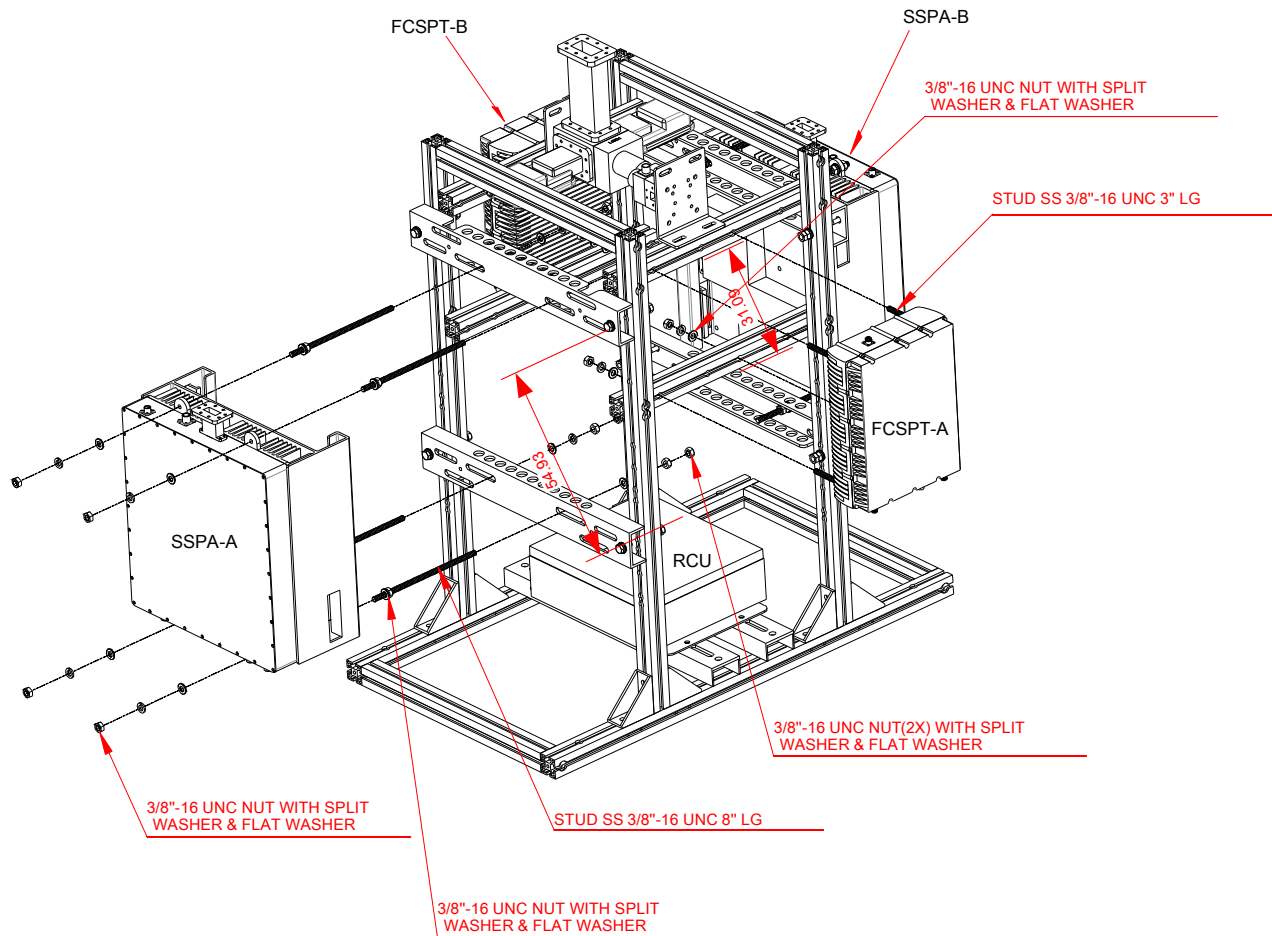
RCU, SSPA, FCSPT mounting frame
